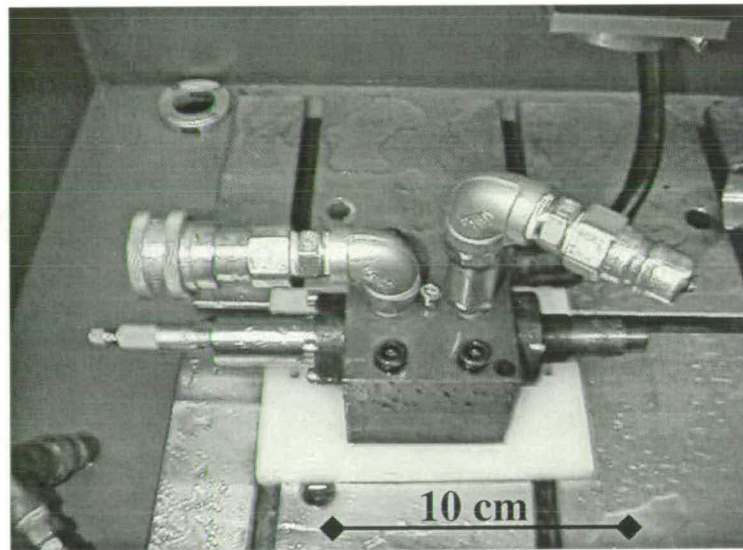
Cell and alignment system for ECM finishing of tensile test specimens; an application in which high accuracy can be achieved by ECM
